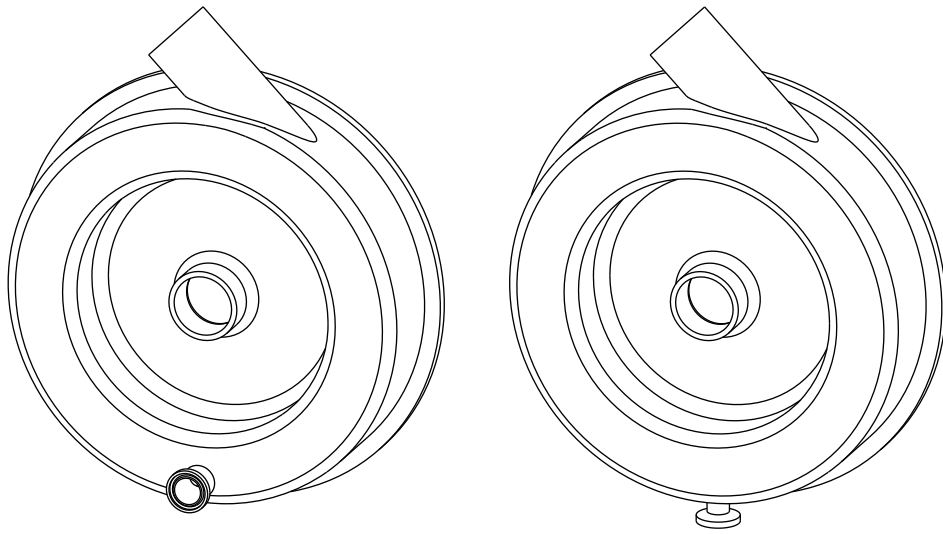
Pump Impeller Configurations
